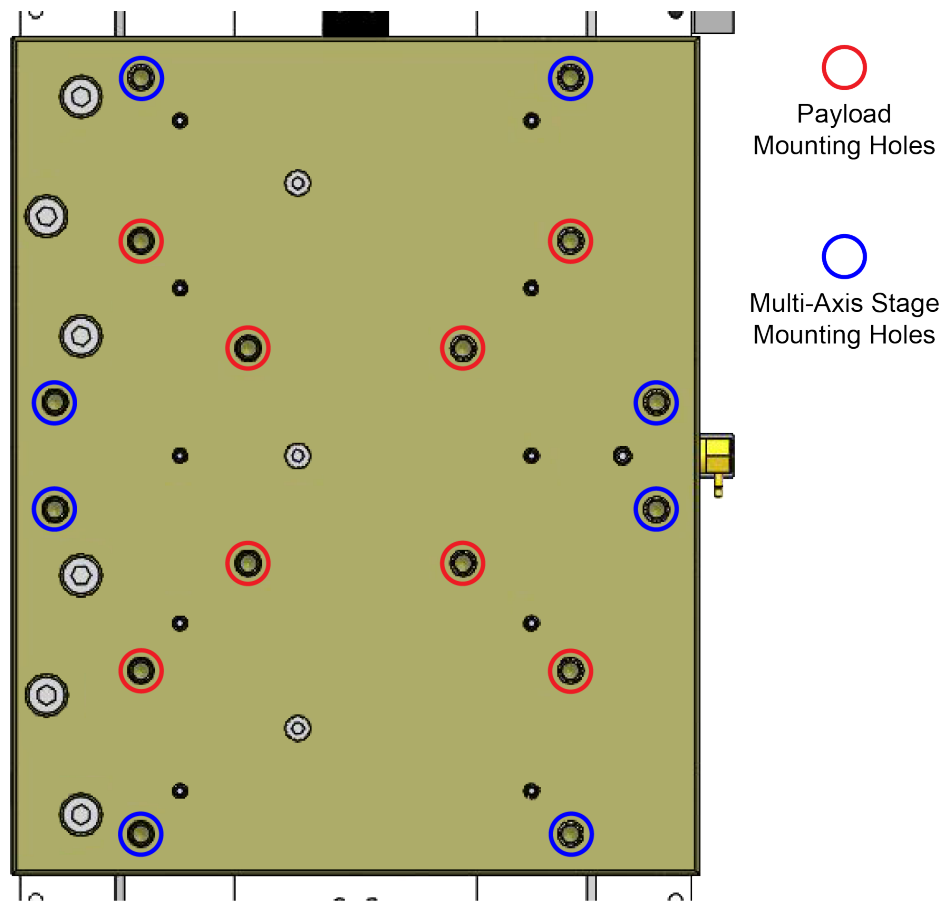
Payload and Multi-Axis Stage Mounting Holes
